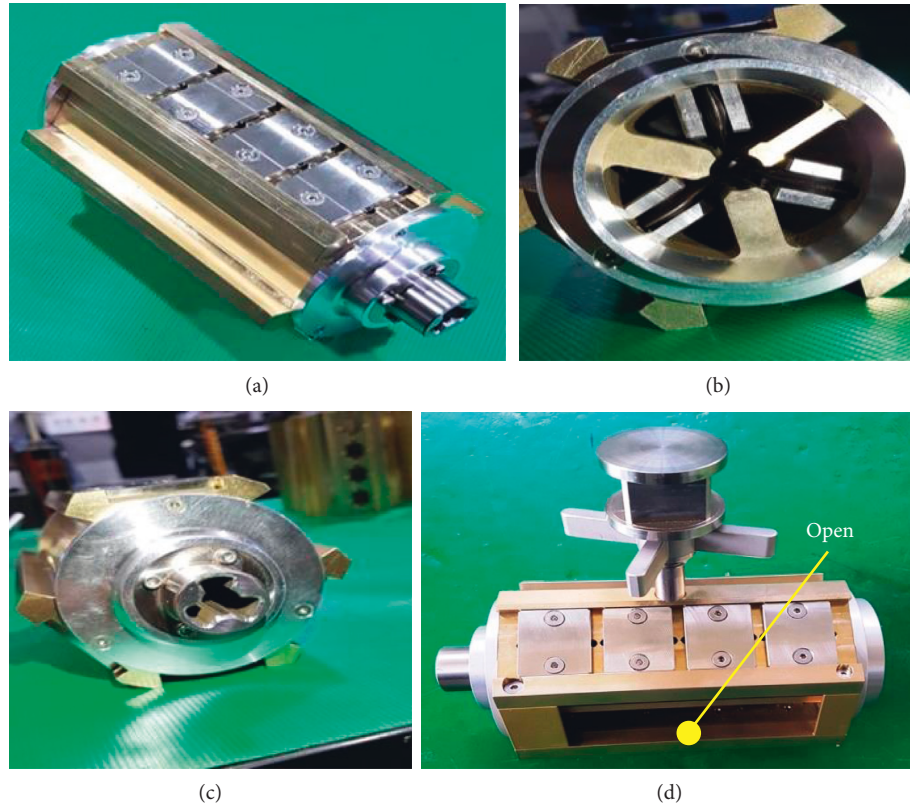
Newly developed 3-CUT blade module and loading unit: (a) front view, (b) left view, (c) right view, and (d) loading unit.
